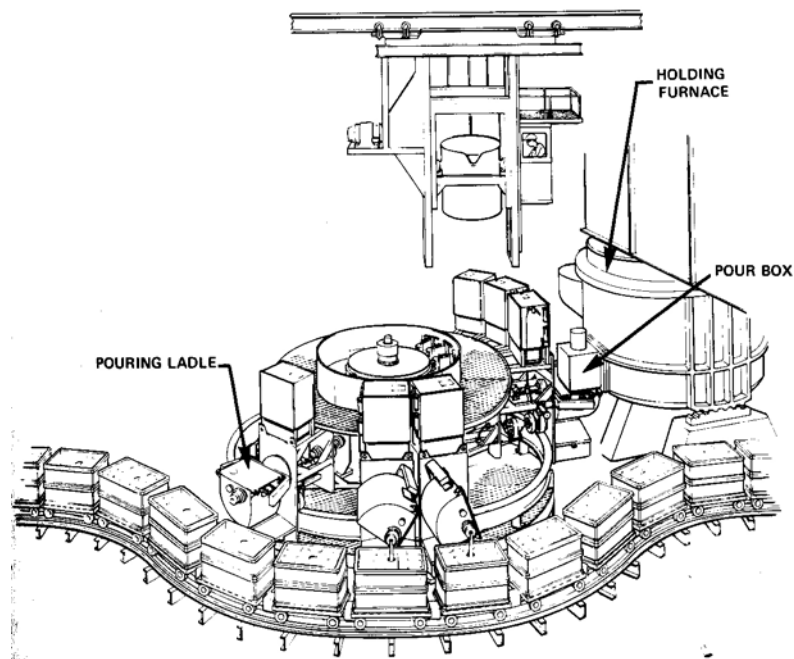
Pouring molds on a conveyor line. (Courtesy The Link-Belt Company.)
